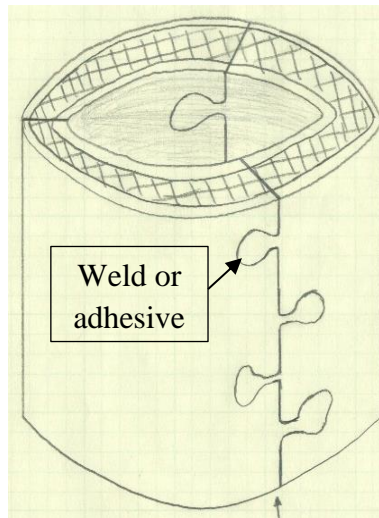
Puzzle piece weld (2a) and puzzle piece adhesive (2b)
